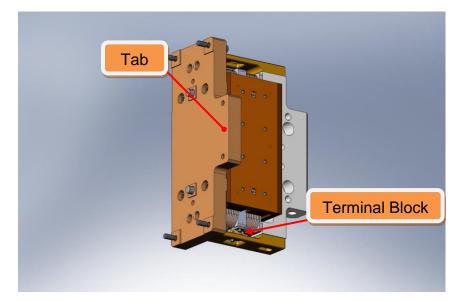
Actuator Magnet Mount bolted to Field Assembly. Note location of tab on Magnet Mount with respect to Terminal Block on bobbin.
